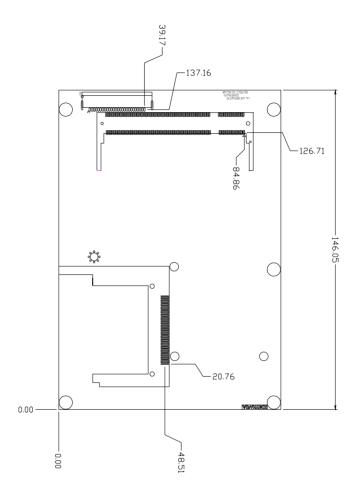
PCM-9380/9386 Mech Drawing (Solder Side)
